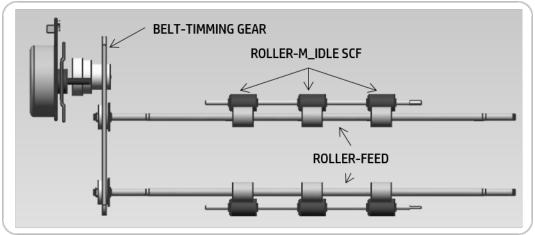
Automatic document feeder(ADF) feed drive assembly
